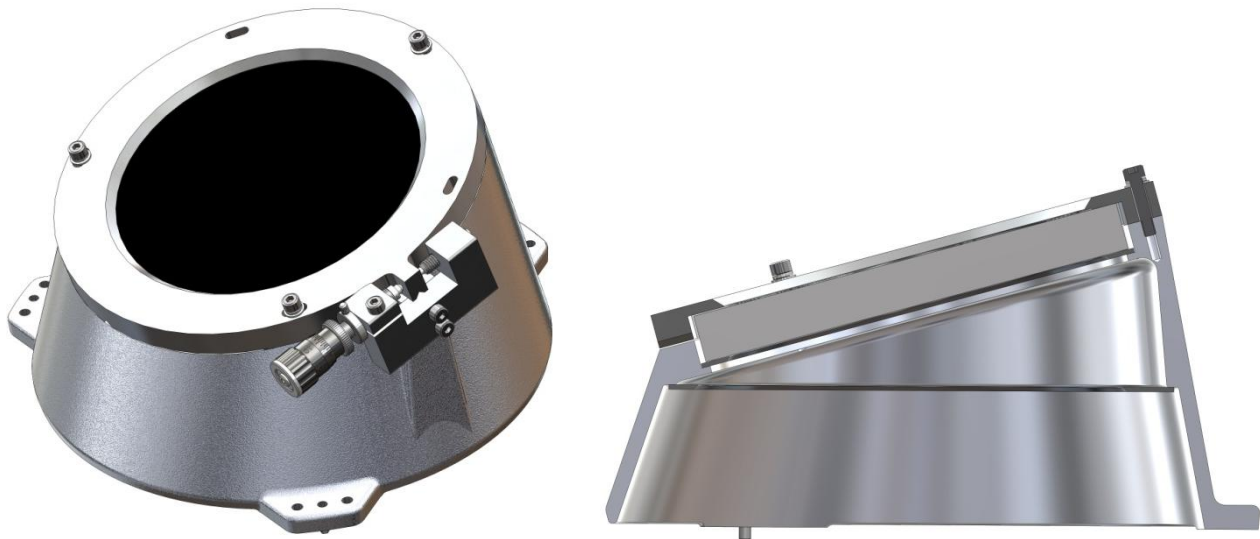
Isometric and section view of the adjustable grating assembly. The left model shows the grating adjustment unit, which is removed once the alignment is complete.
